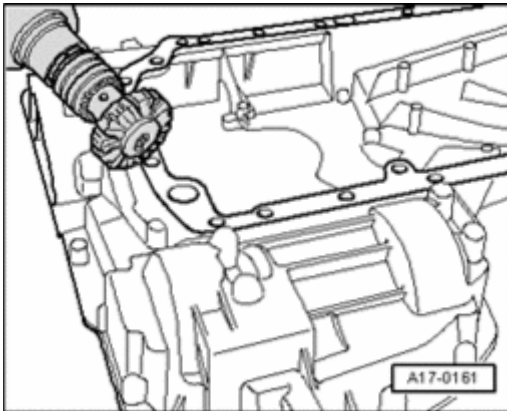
Using Rotating Plastic Brush To Remove Remaining Sealant From Oil Pan (Upper Part) And At Cylinder Block
